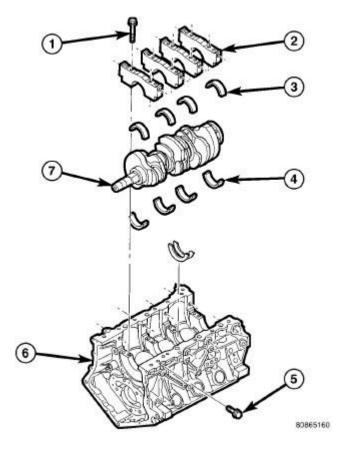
Cylinder Block & Crankshaft Courtesy of CHRYSLER LLC
